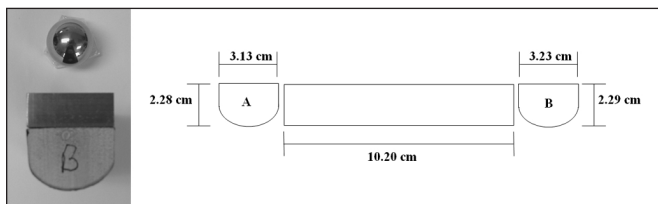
Schematic photograph and drawing of the wood-metal loading jig to impose load onto foam sections. Drawing and dimension details the wooden section. The photo shows the end view of the loading jig with the ball-bearing used to “float” the jig against the travel surface of the upper platen, which produced the load. The ball fit into a recess milled into the metal plate matched to recess centered on the upper platen on the load press.
